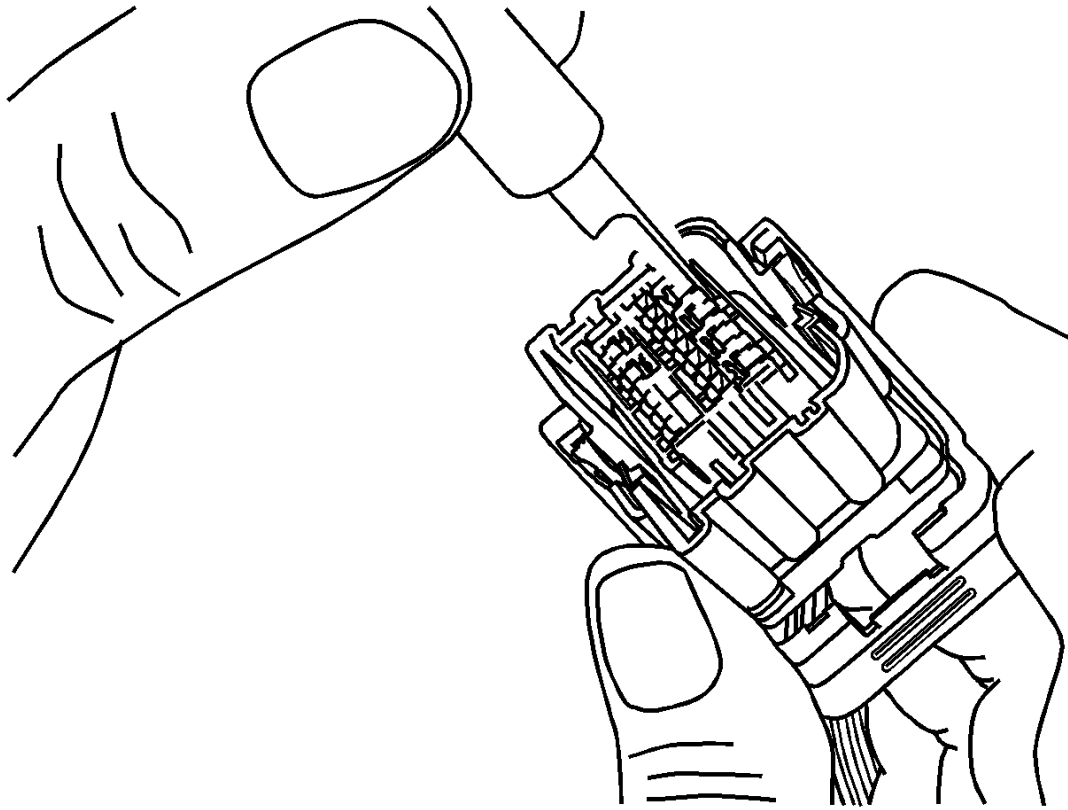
View of Terminal Release Tool & Rear of Connector Body
